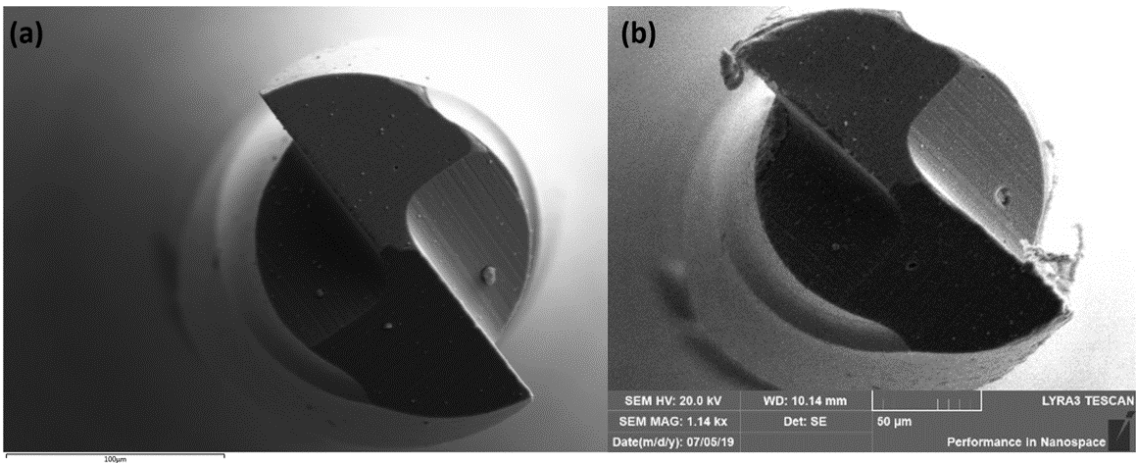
SEM image of tool 1 (a) before (b) after machining.
